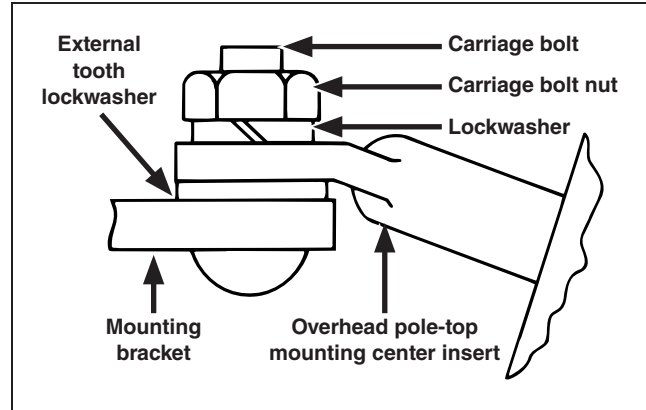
Attaching an overhead pole-top style TripSaver II recloser mounting to the mounting bracket.
